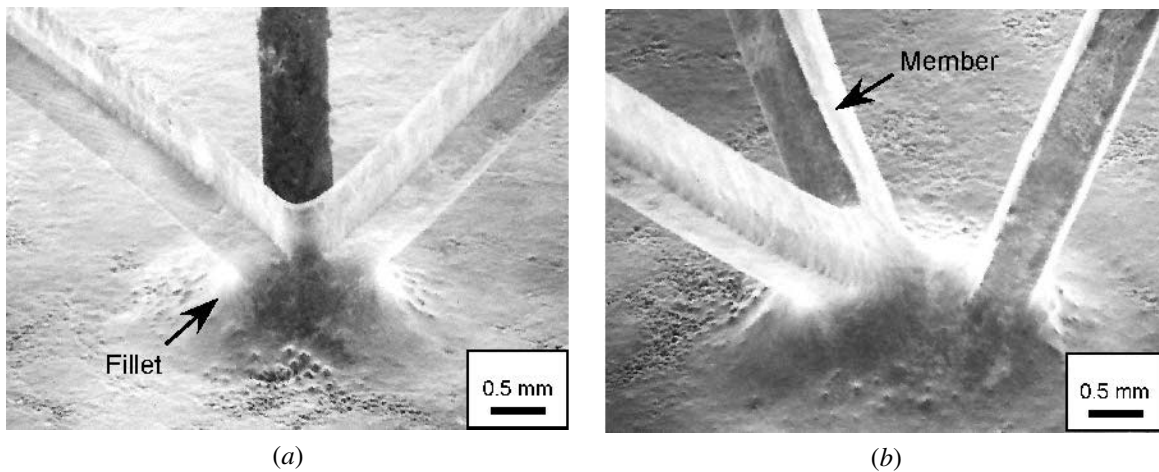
Typical core-facesheet bond for an aluminum alloy sandwich structure with a tetrahedral core. Capillary forces drew the melt to the joints producing large curvature radius fillets (to resist cracking): (a) end view and (b) side/angle view.
